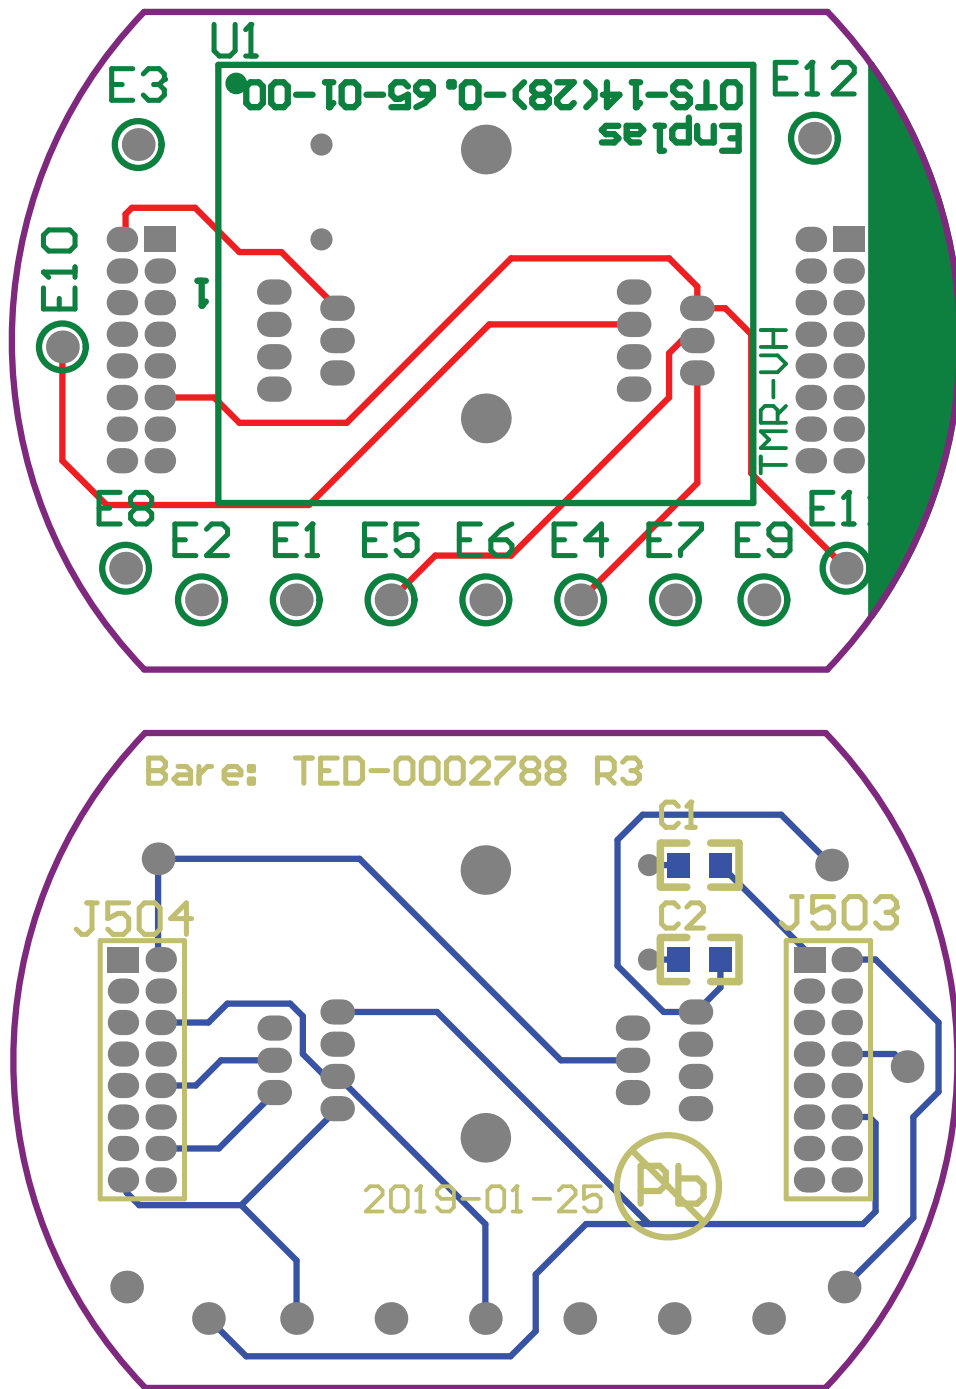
A33110 (A33115) Socketed Granddaughter Board, Single Die
